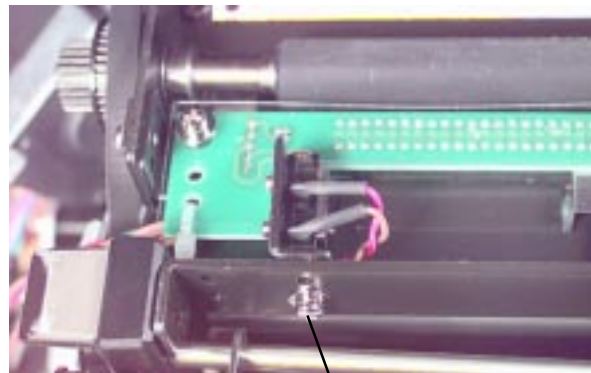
REMOVE (2) SCREWS TO DETACH COVER PLATE
